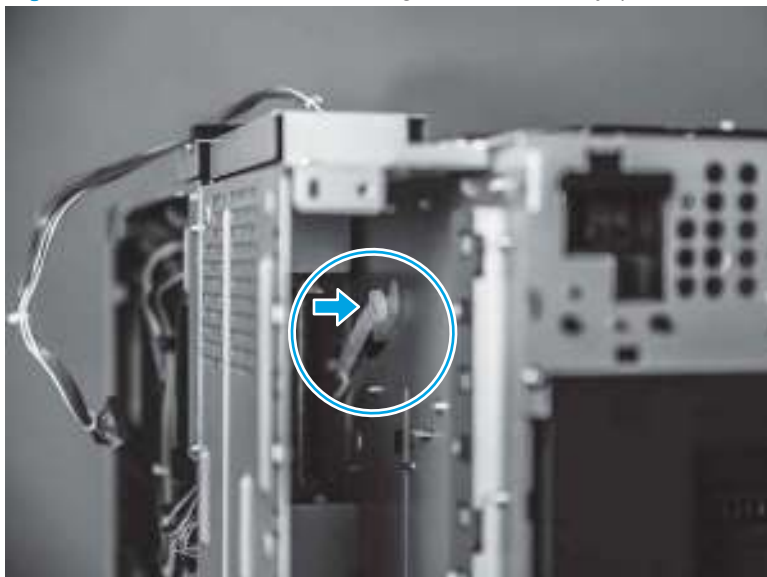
Reinstall the cartridge-lifter assembly (M830; 3 of 6)
